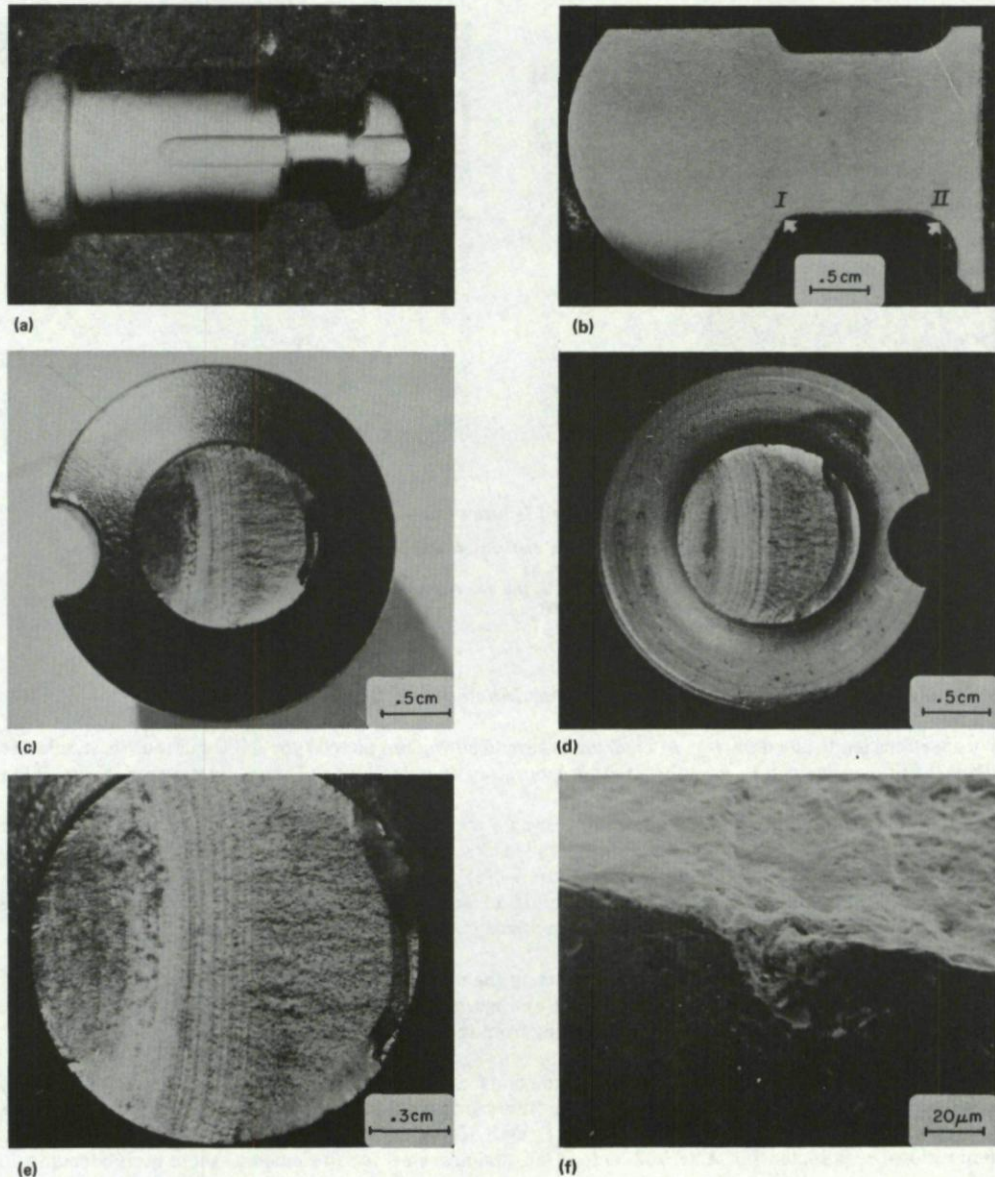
Pitting corrosion and fatigue failure of a 4340 steel tip tank latch knob
